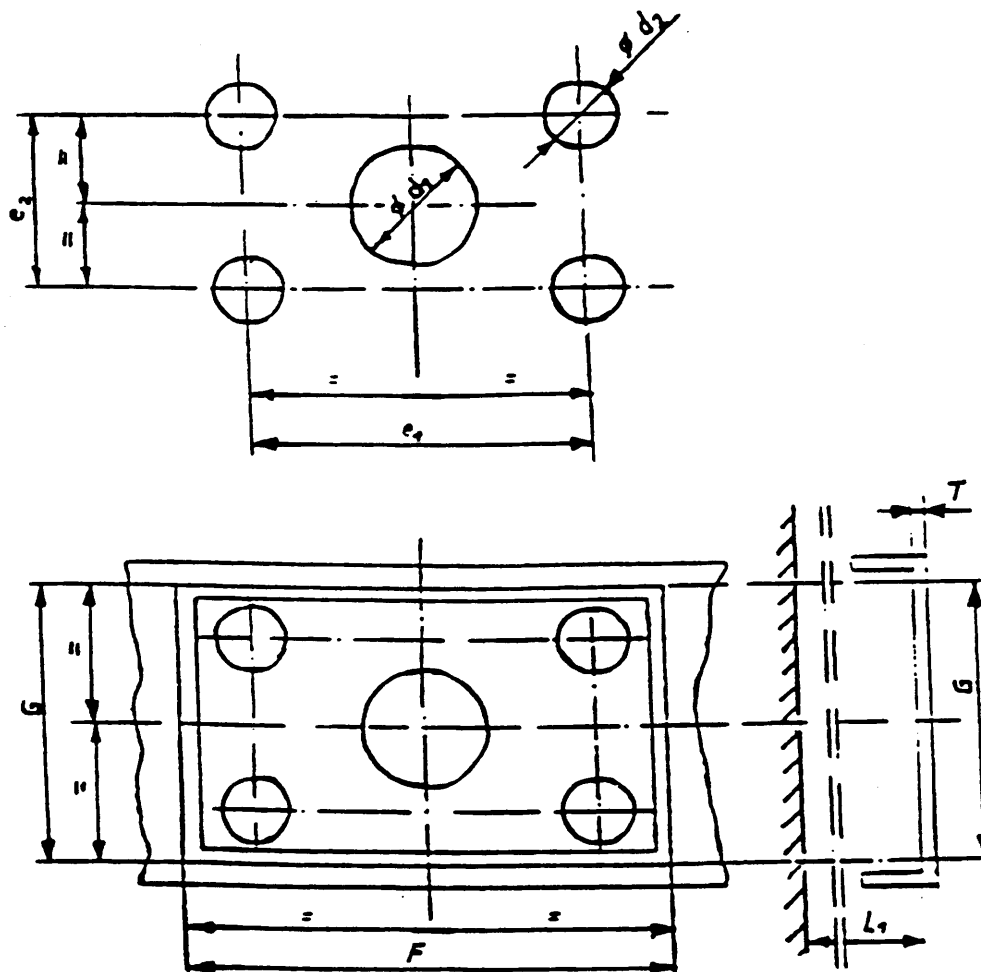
Mounting dimensions for standard drawbar couplings (see Table 8)
